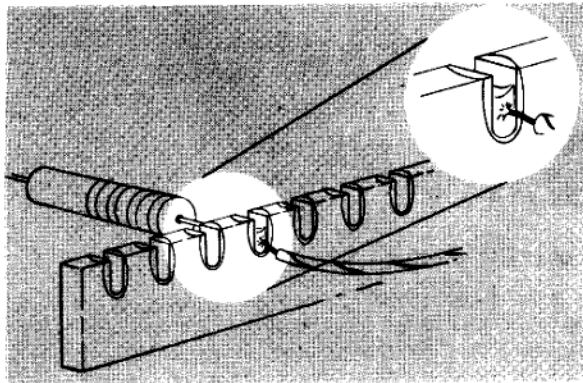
A slight fillet of solder is formed around the wire when heat is applied correctly.
